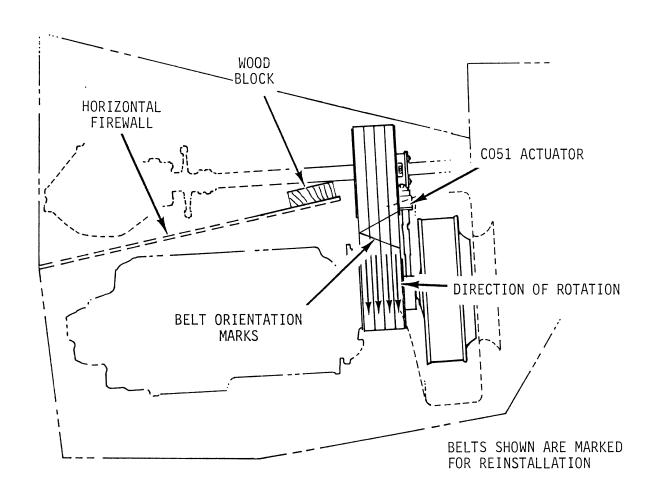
V-BELT AND ACTUATOR REMOVAL
